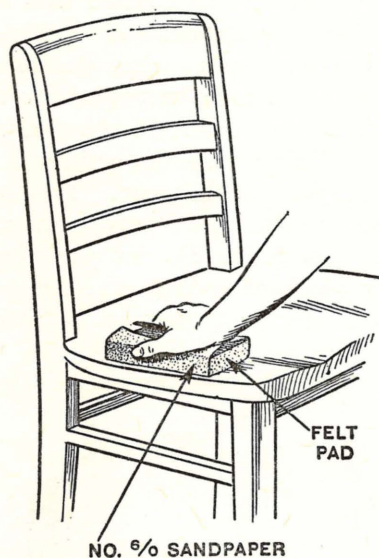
No. 6/0 or 7/0 sandpaper should be used on flat surfaces.
